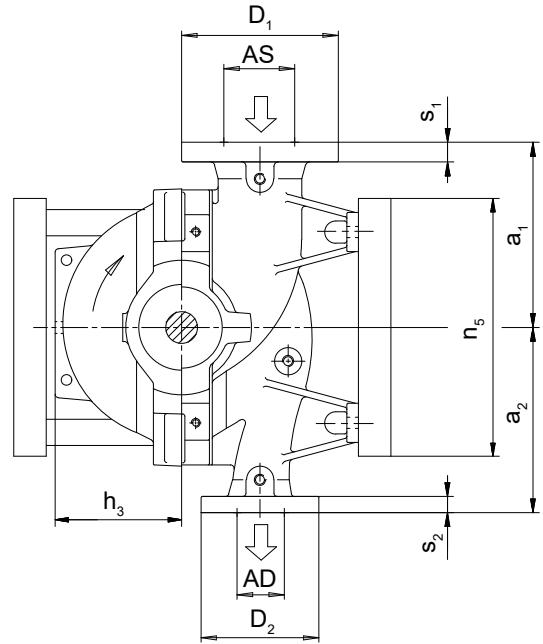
DB installation (6 foundations bolts), dimensions in [mm]
